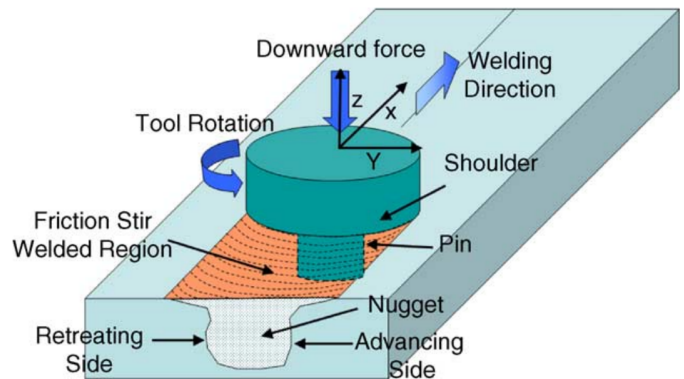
Schematic overview of the friction stir welding process [1].
